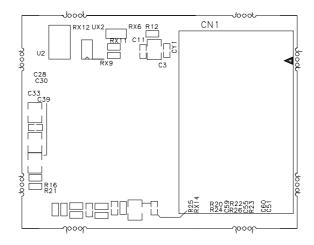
PCB No. 96534-SE CPU Board Layout (Bottom)
